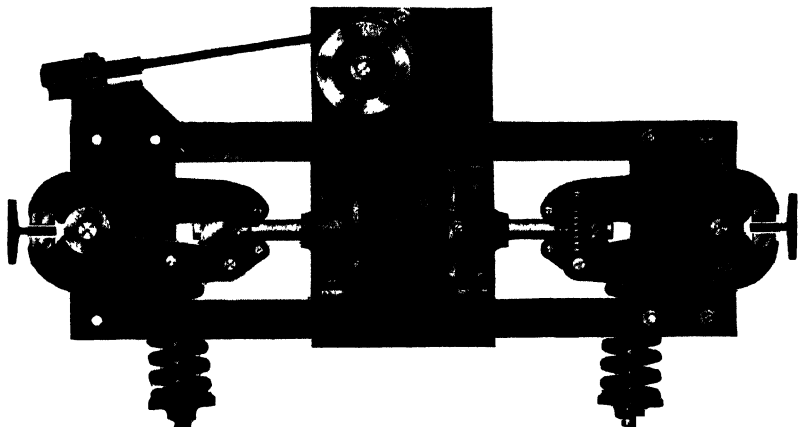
WEDGE-CLAMP SAFETY GEAR
